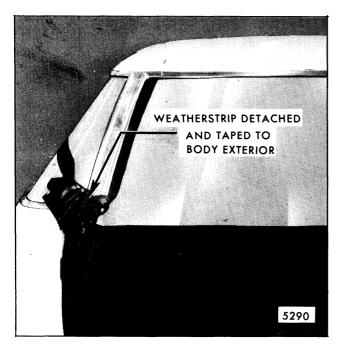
Body Opening Weatherstrip Detachment for Window Removal
